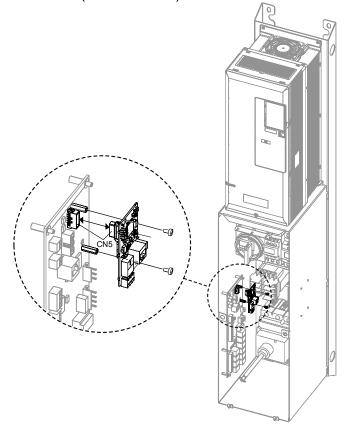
Insert Option into Bypass PCB CN5 Connector Port - Model Z1B1D002
